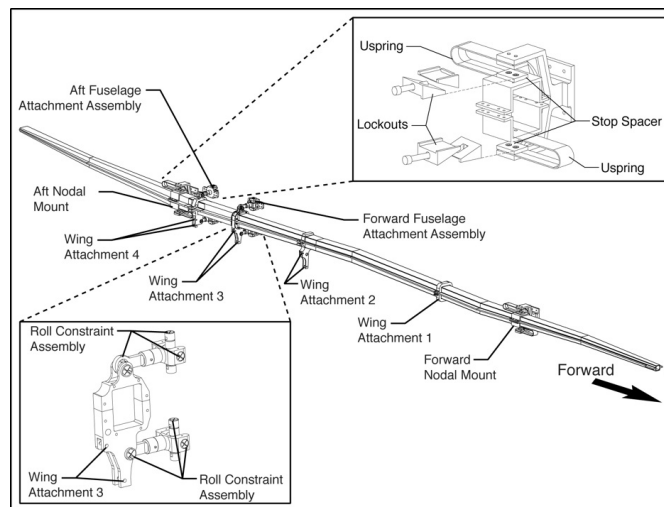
Fuselage beam showing attachment points and nodal mounts.
